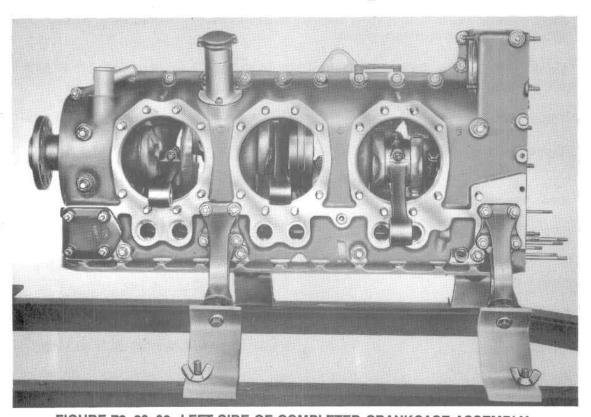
LEFT SIDE OF COMPLETED CRANKCASE ASSEMBLY.
